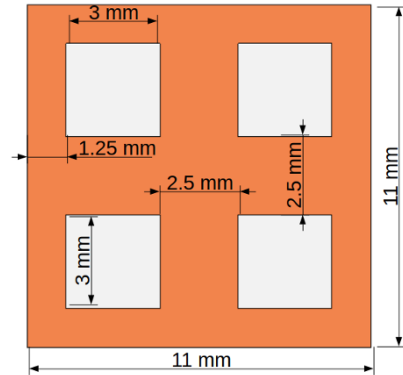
Dimensions of 3-D printed of approx. 70% infill ratio structure with “rigid” left and right parts for clamping to a machine.
